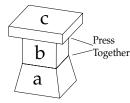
Here is the stack of styrofoam parts. After making many of these castings I have found you do not have to fear air pockets forming under the lip of "C", but while casting, run a wire under the lip to remove any possible air pocket. It will cast just fine. Use a 3000 degree Castable like Mizoo Castable. There are many producers of super duty castable. I currently am using a product called Mt. Savage. Works fine.
